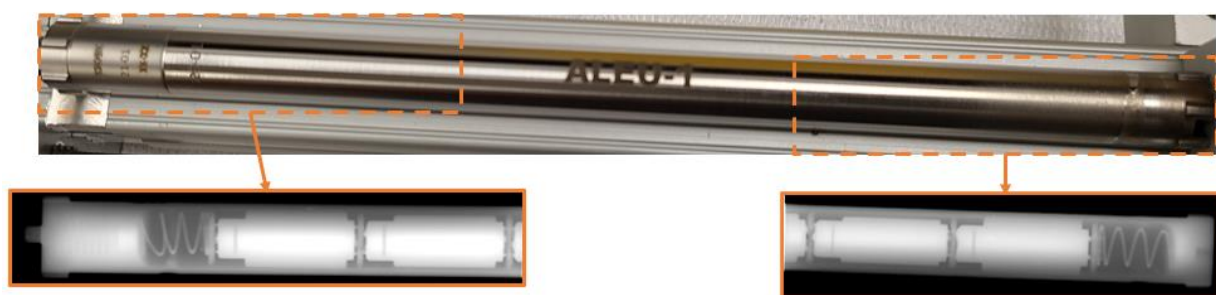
Final target fully welded (top), and radiography of the welds (bottom left and right)
